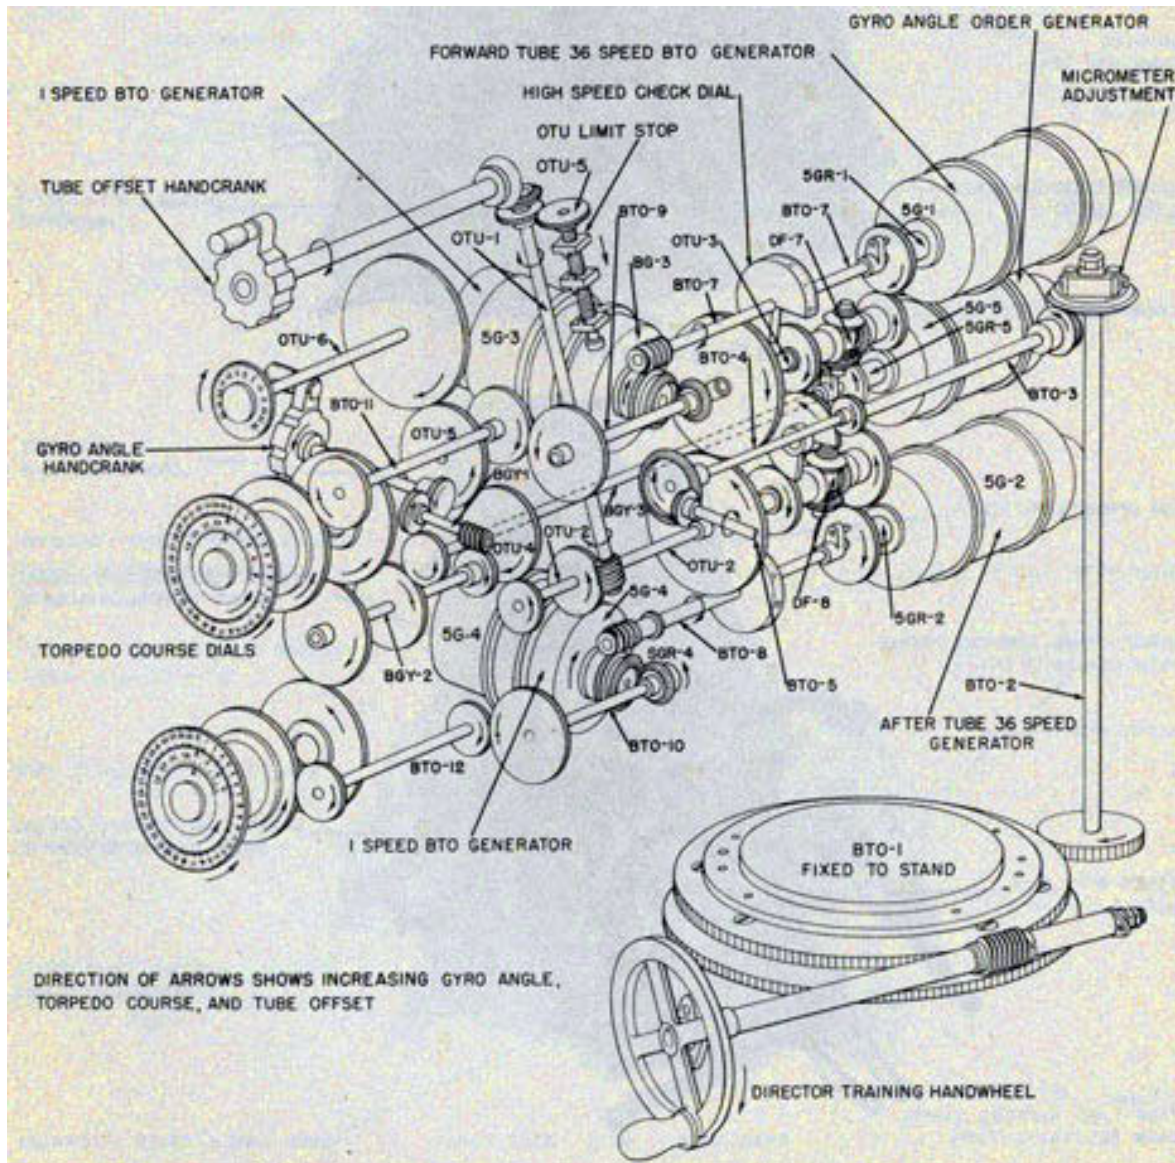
Diagram of transmitter shafting, gearing and synchro generators.
